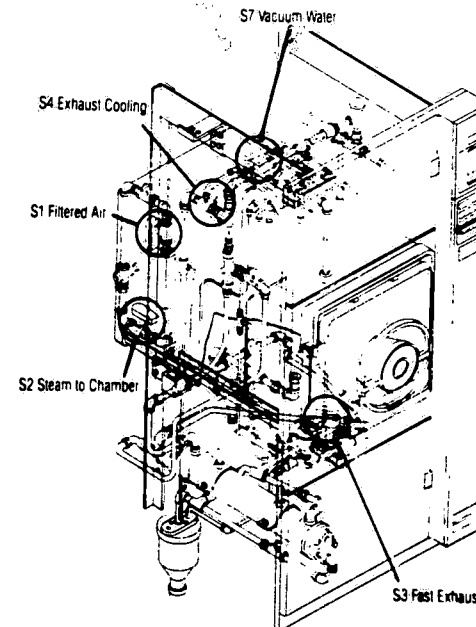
Solenoid Valves (Vacumatic Unit)
